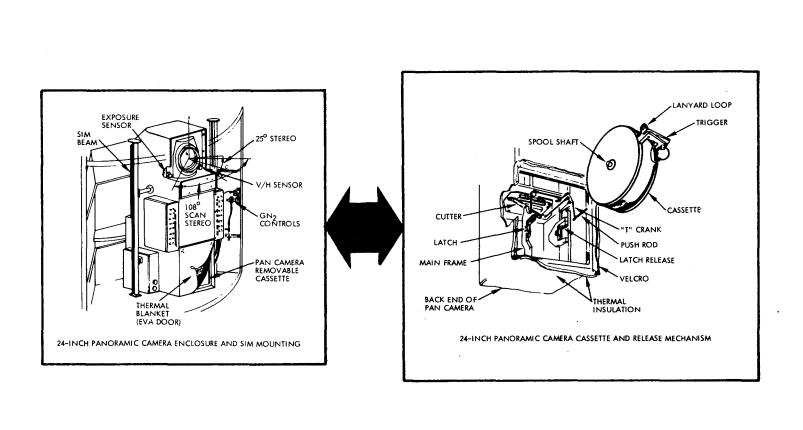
(b). SIM Bay 24-Inch Panoramic Camera Cassette Installation Detail
